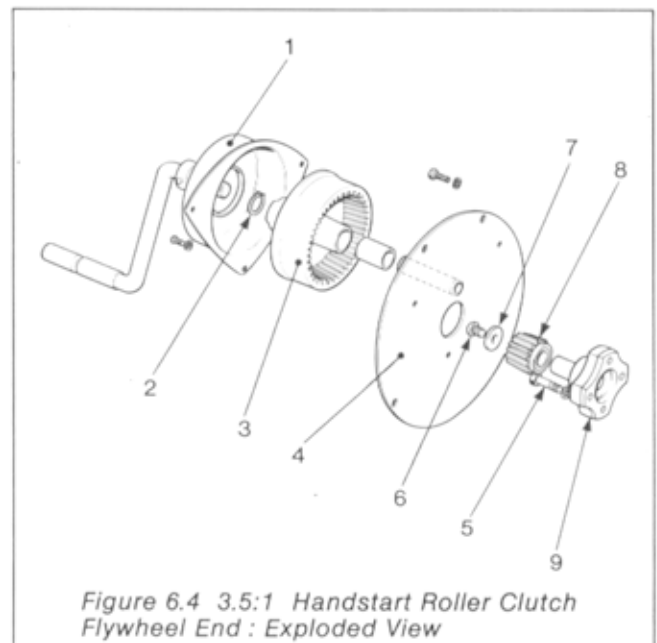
3.5:1 Handstart Roller Clutch Flywheel End : Exploded View
